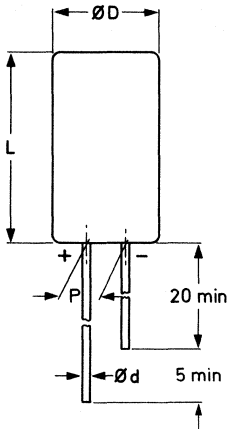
Style 1; see Table 1 for dimensions d, D, L and P.
